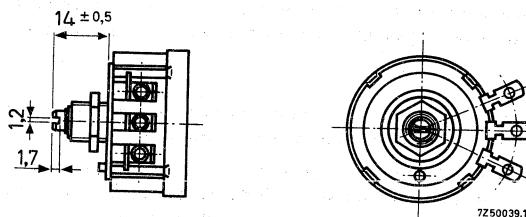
Potentiometer with spindle with screwdriver slot. Dimensions are identical to those in Fig. 1 except as shown.
